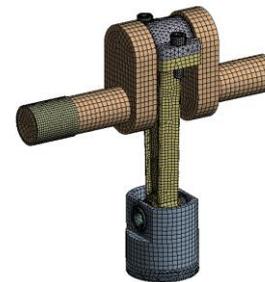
Crankshaft connecting rod piston mechanism mesh map.
